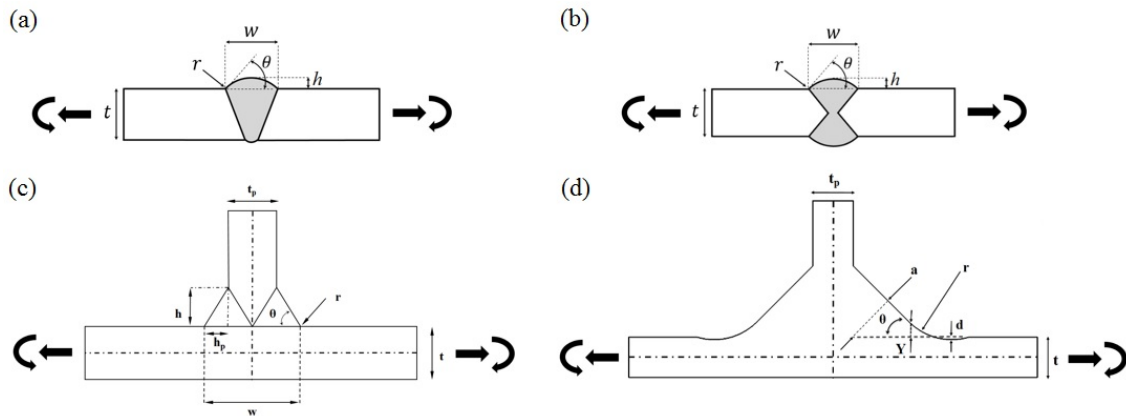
Investigated configurations in the current study: (a) single-V, (b) double-V butt welds and (c) as-welded, (d) TIG-dressed T-joints.
